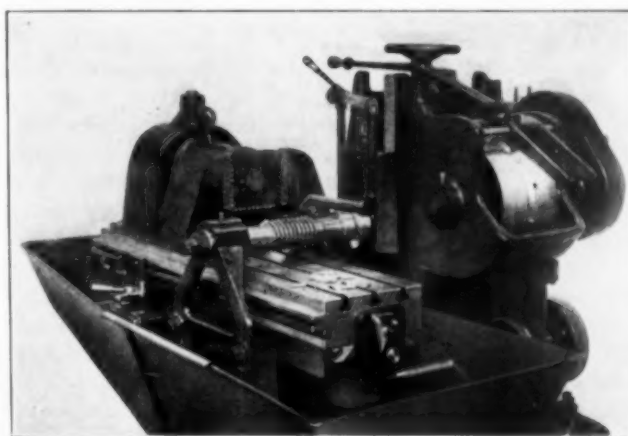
ONE OPERATOR AND THIS MACHINE PRODUCED MORE THAN MAN AND BOY WITH STANDARD MACHINE
